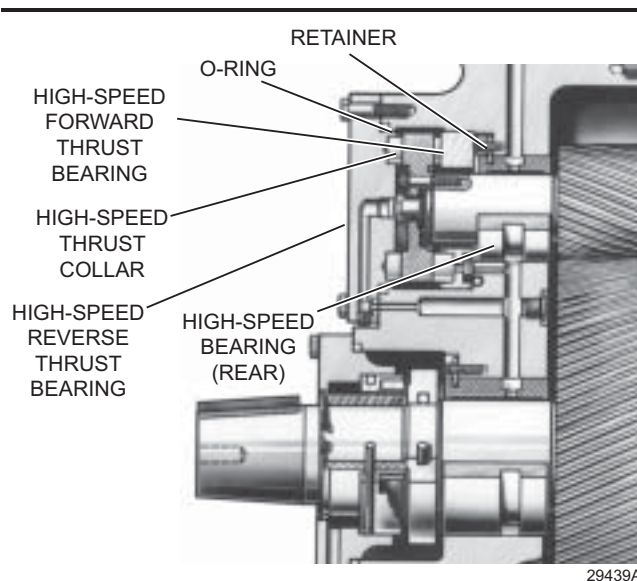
HIGH-SPEED BEARING COMPONENTS
